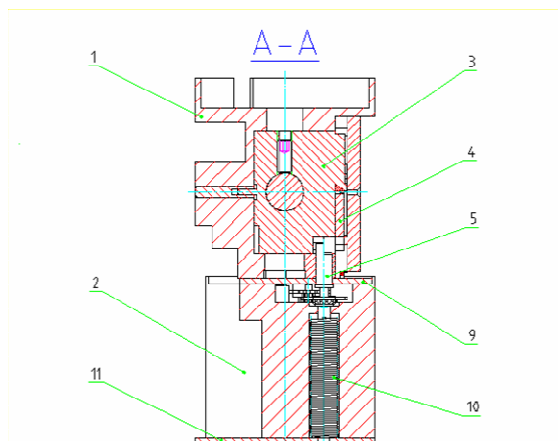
Scheme mutual location of fuse mechanical elements; 1-holder of primer (rotor), 2-holder of time mechanism, 3-rotor, 4-slider, 5-lock on the wheel of time mechanism, 9-bearing plate, 10-spring of time mechanism
